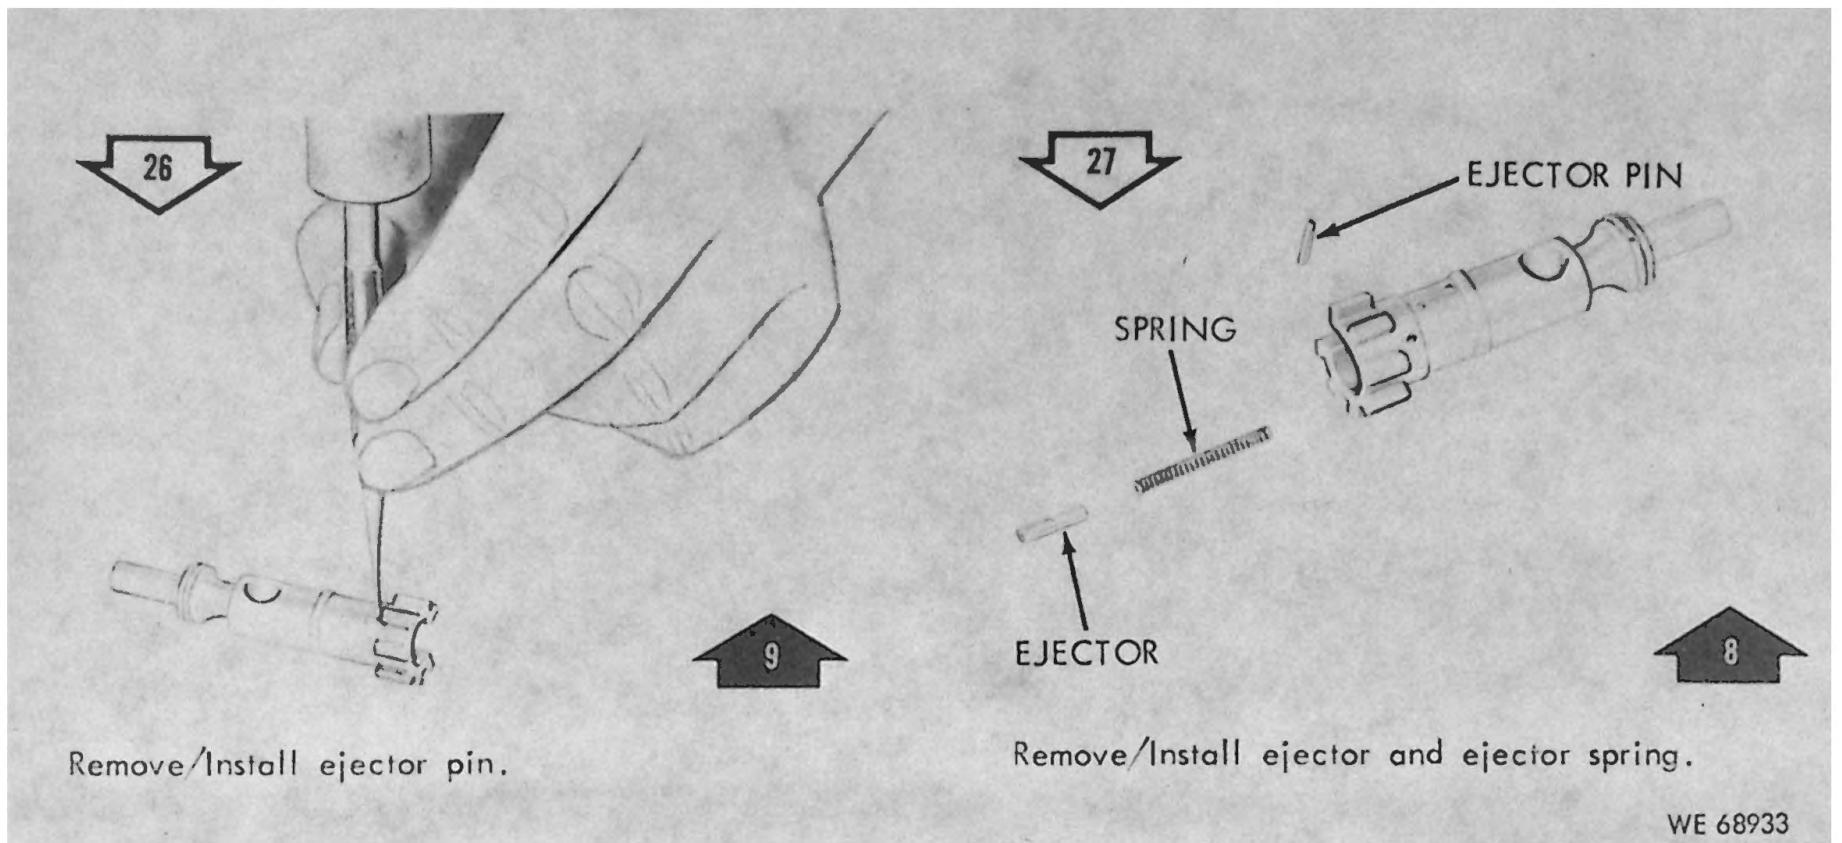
Disassembly/assembly of rifle (6 of 8)
